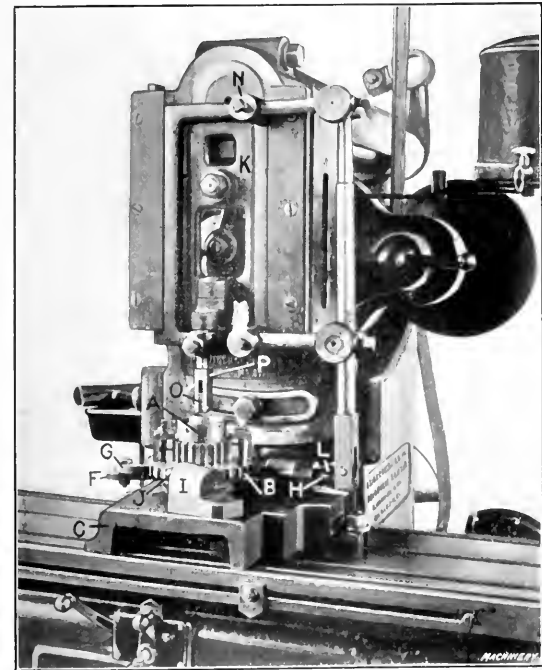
Automatic Indexing Fixture in Position on Brown & Sharpe Milling Machine
